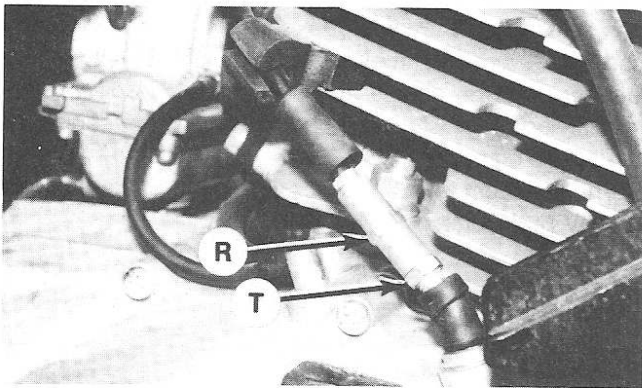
Rotate adjuster (R) to align oil pump mark with guide pin. See text.
